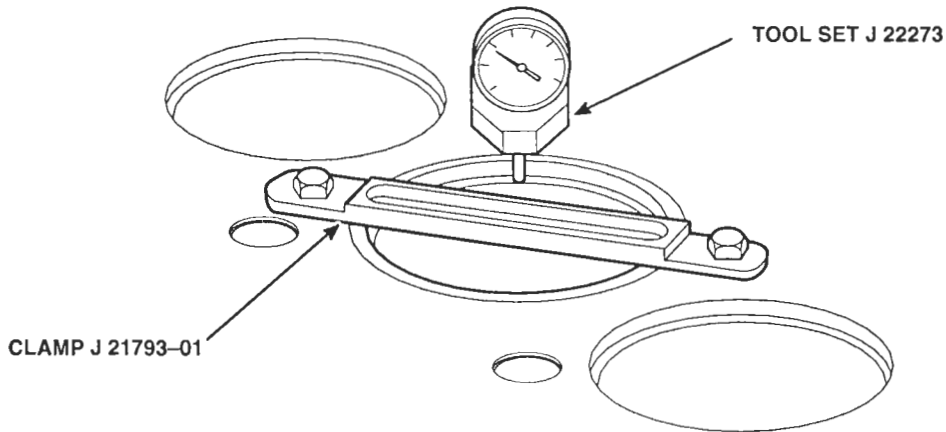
Checking Distance of Linear Flange Below Top Face of Block
